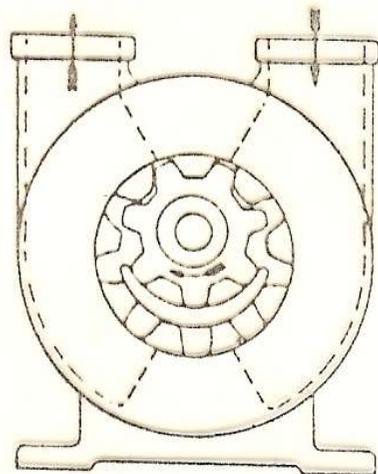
INTERNAL GEAR PUMP (with crescent)
